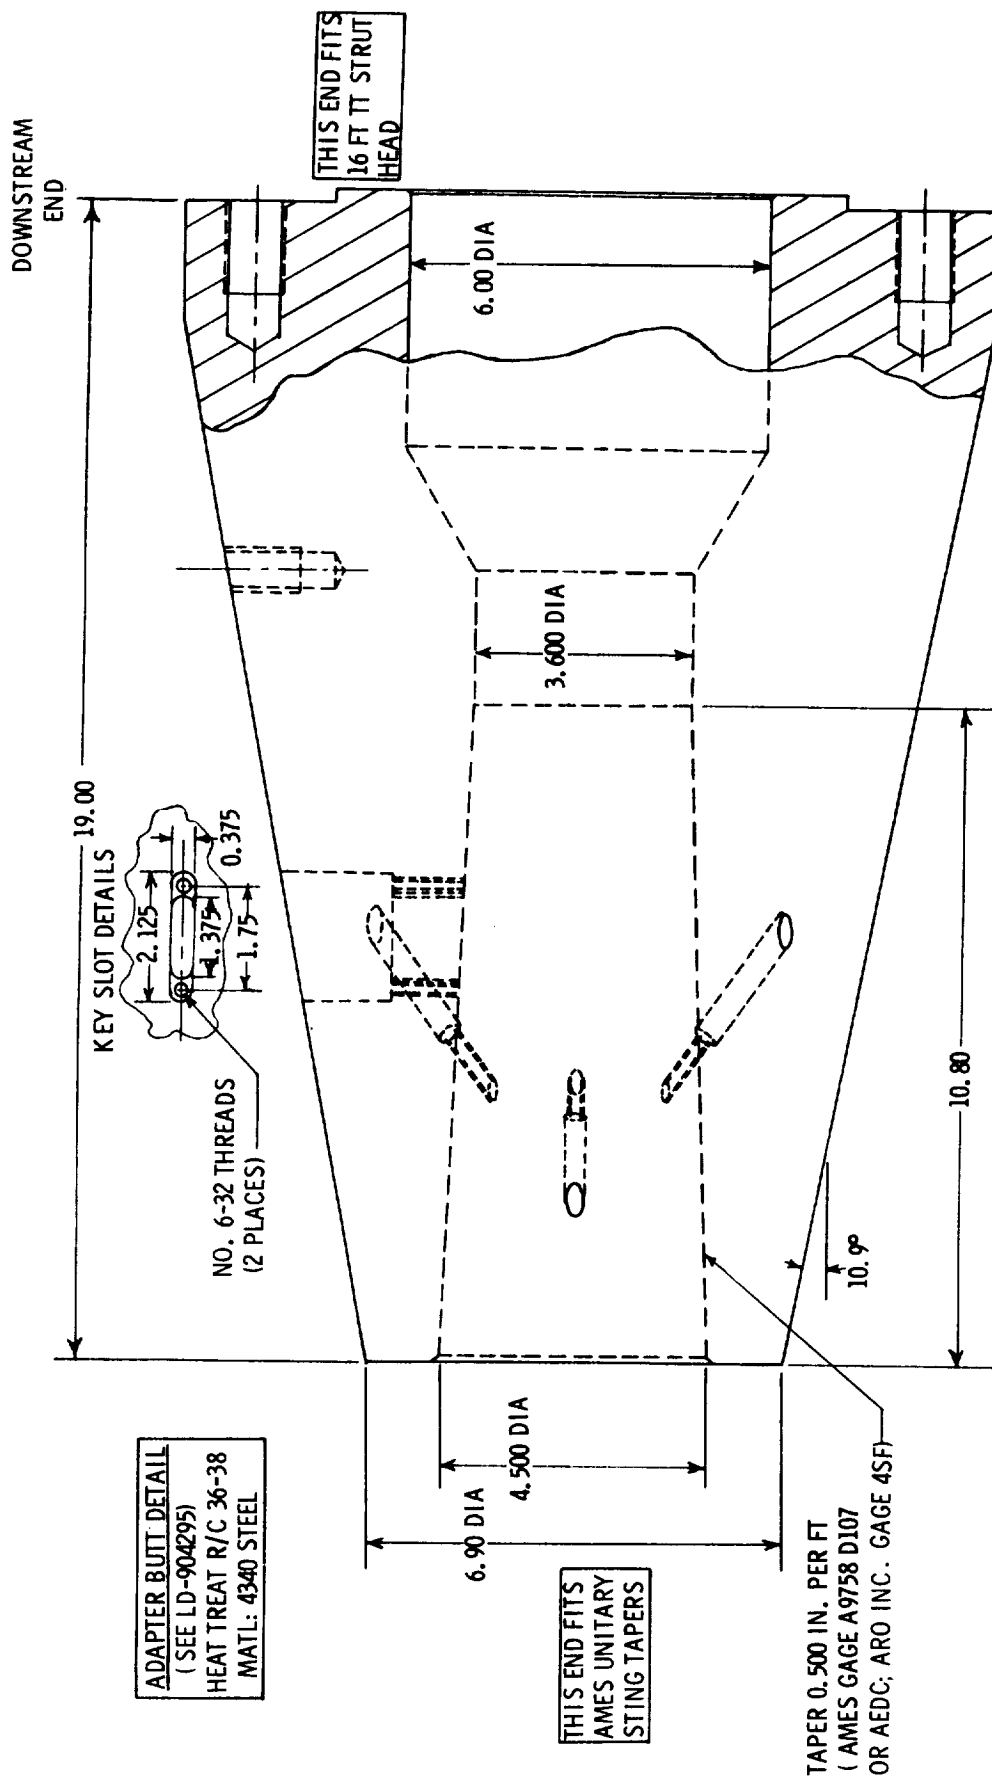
Sketch of adapter butt LD-904295. (All dimensions are in inches unless otherwise indicated.)
